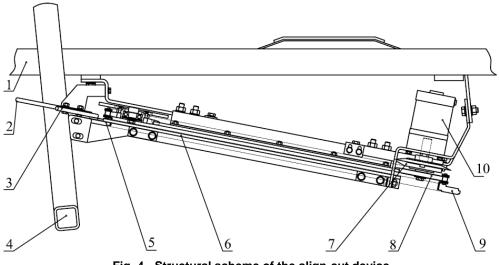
Structural scheme of the align-cut device 1 - The upper clamping chain; 2 - Left guide rod; 3 - Right guide rod; 4 – Rack; 5 –arranged disk of Garlic; 6. Align chain; 7 - Disc cutter; 8 – Sprocket; 9 - Hook; 10 - Motor
